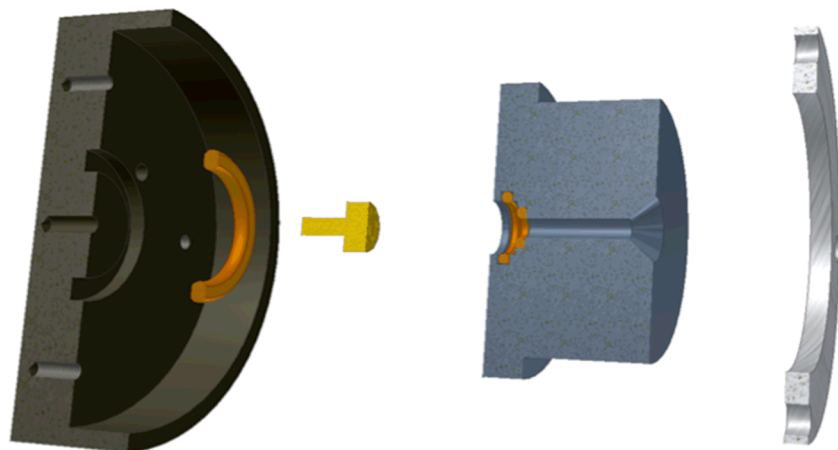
Exploded cross-section view of the electro-deposition cell used to prepare samples.
